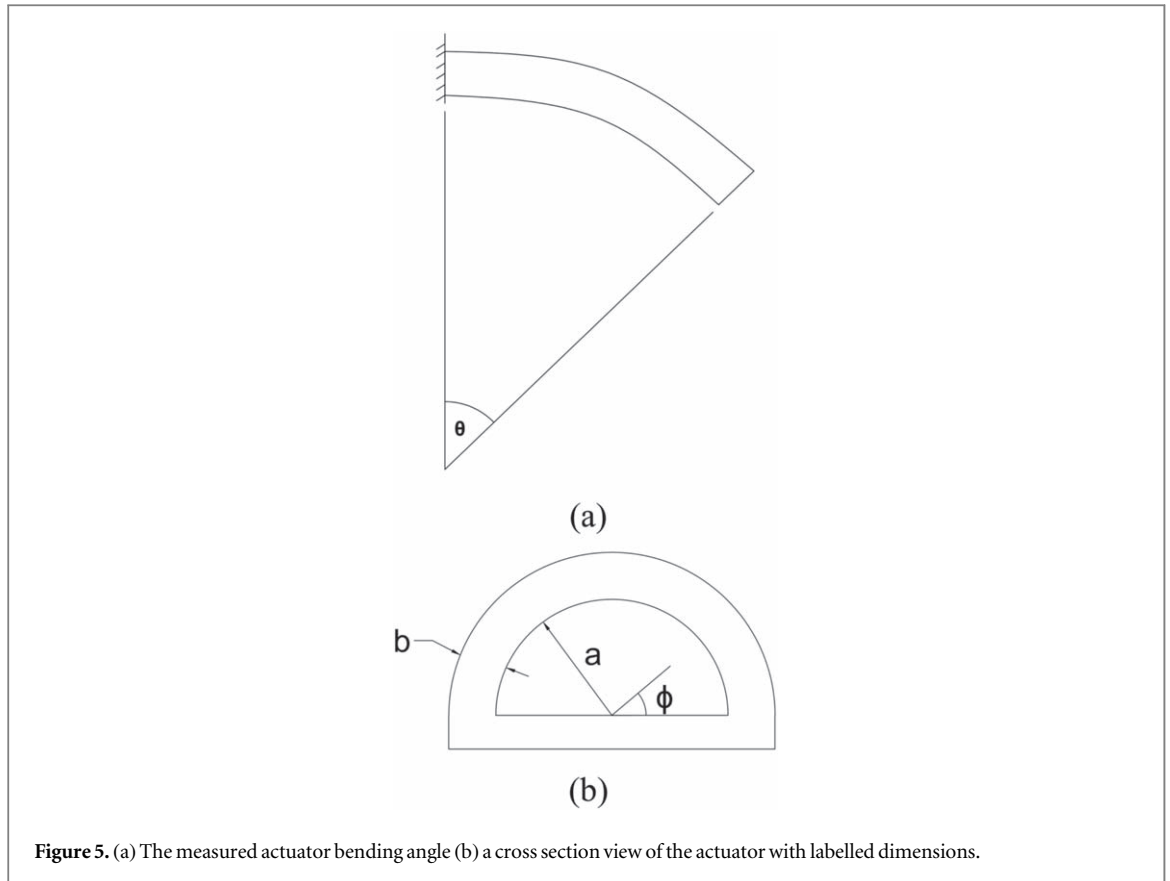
(a) The measured actuator bending angle (b) a cross section view of the actuator with labelled dimensions.
